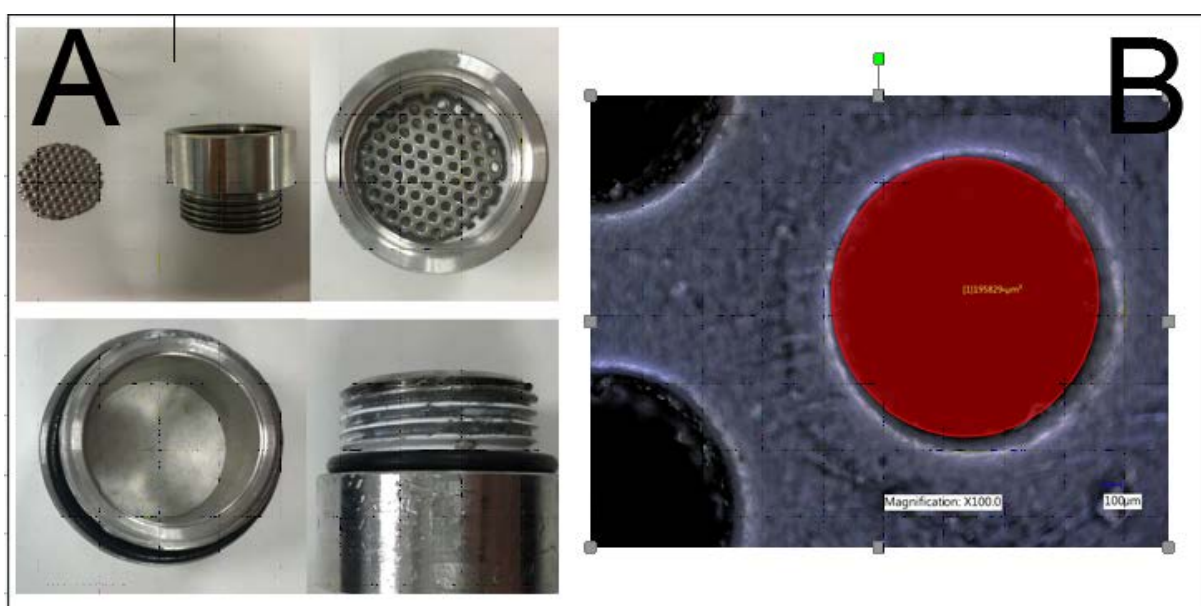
(A) side view of the filter holder (B) surface area of the single hole
